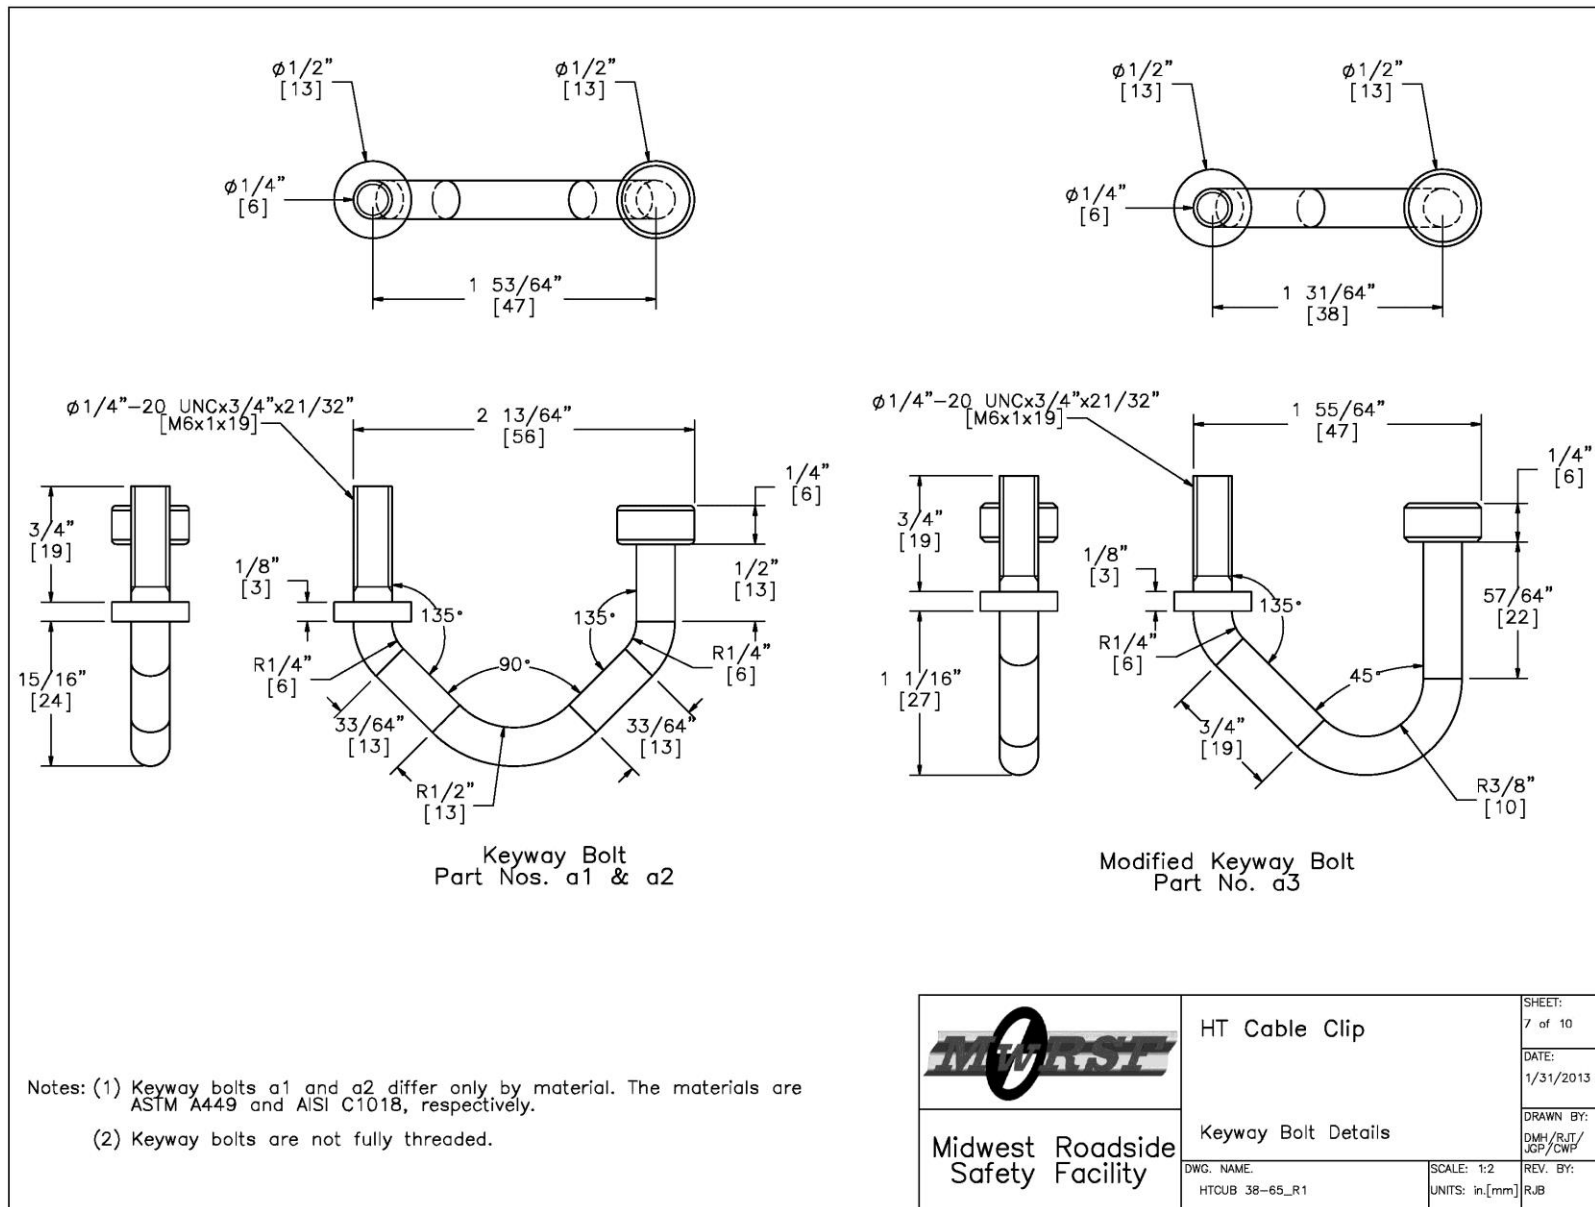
Keyway Bolt and Modified Keyway Bolt Details, Test Nos. HTCUB-38 through HTCUB-65
